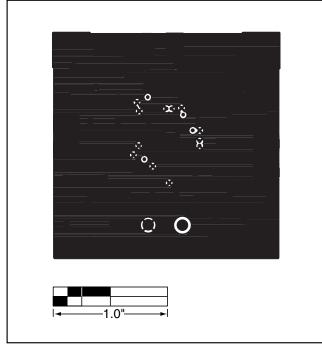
MAX9989/MAX9990 EV Kit PC Board Layout—Bottom Layer Metal
